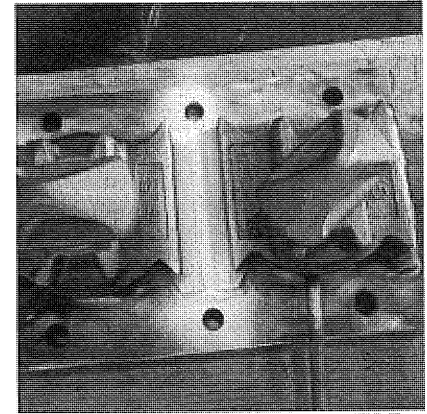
MPI DONE ON CENTRE WELDS ONLY ON THE DOUBLE TWIST LOCKS
